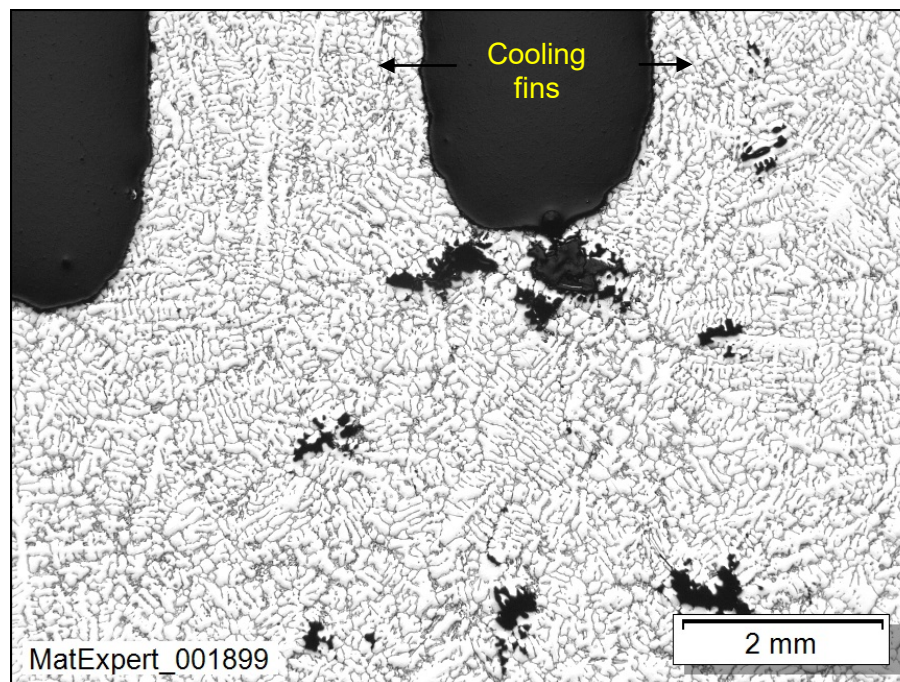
Microsection of the cylinder head's structure with solidification holes (left engine, cylinder 5).
